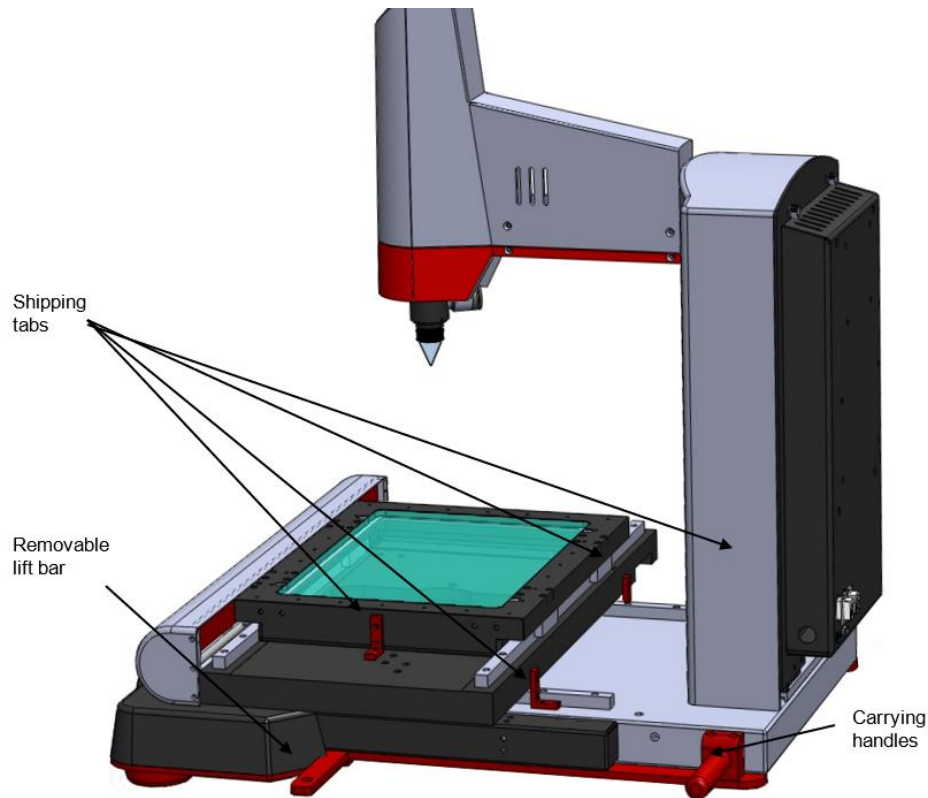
Location of Red Retainer Tabs, Lifting Handles, and Slider Bar
